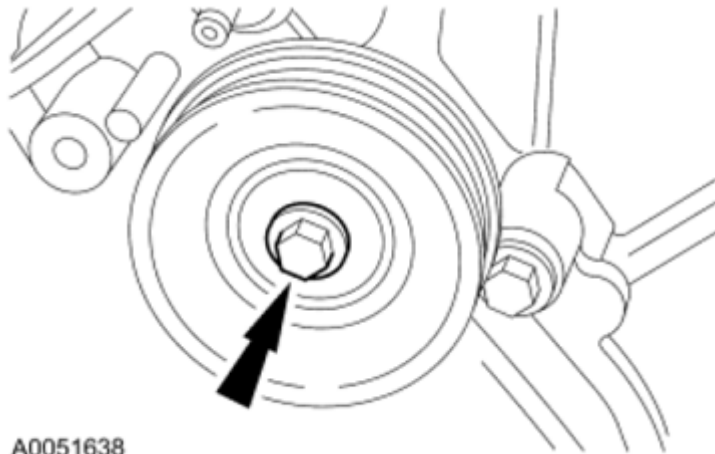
Locating Drive Belt Idler Pulley Mounting Bolt
